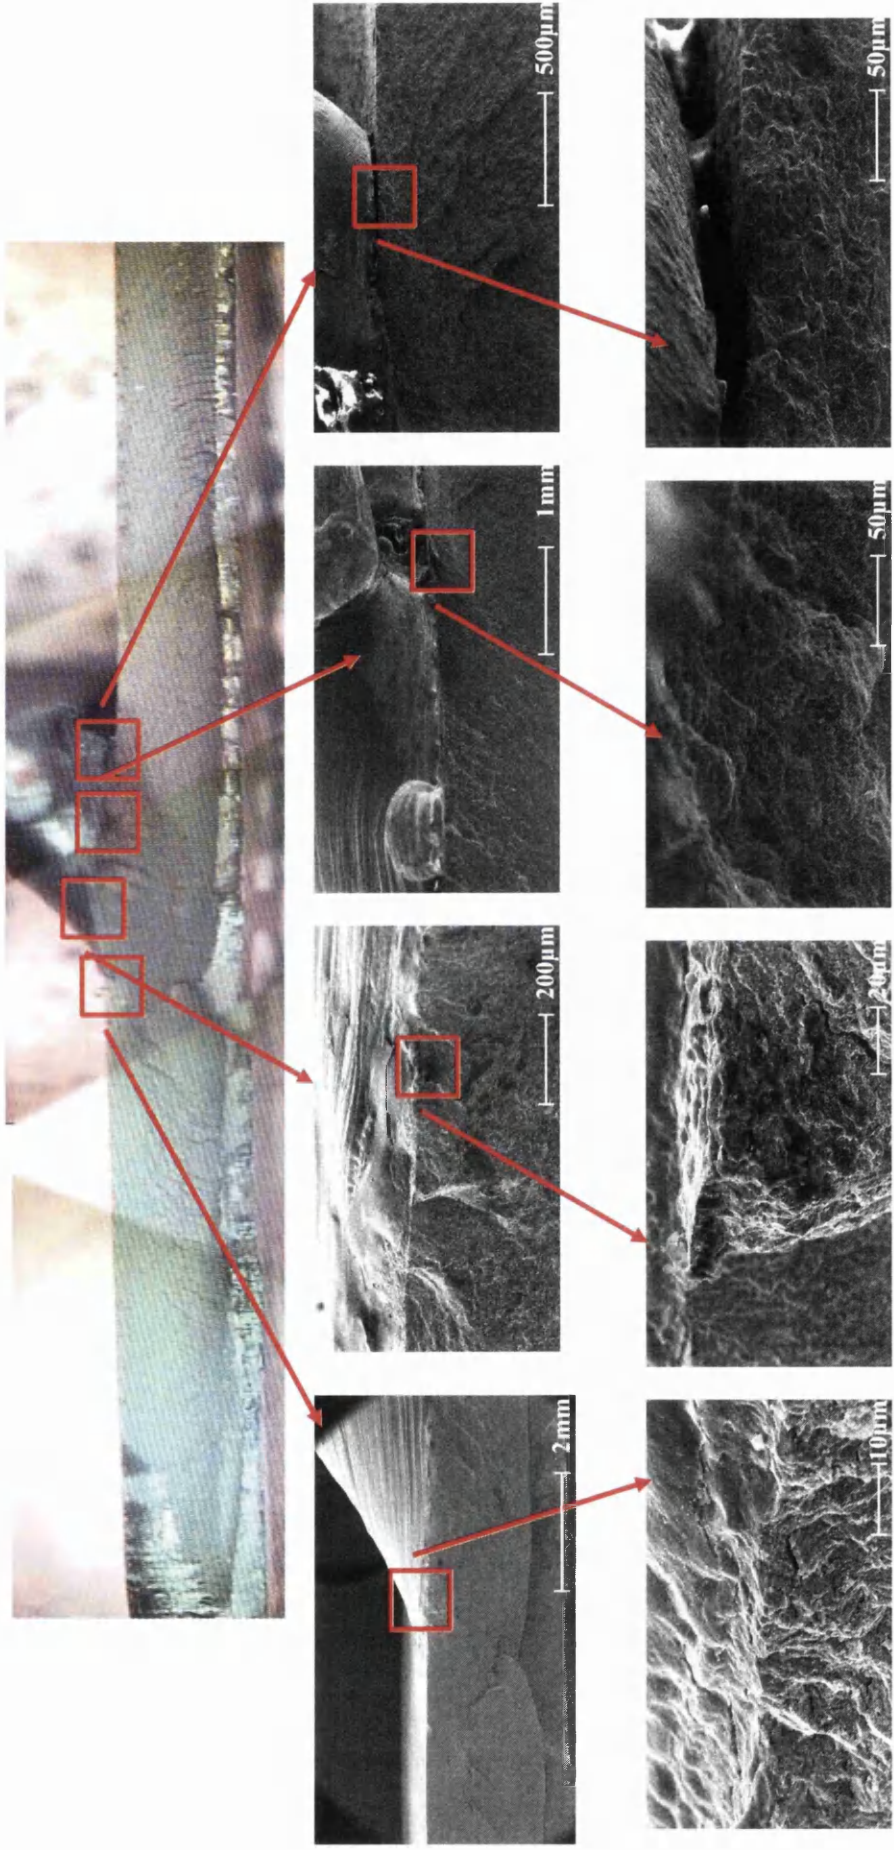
Typical Fracture Surface for GM6 Weld Throat Failure – Weld View
